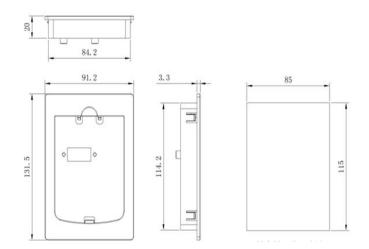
Appearance and installation dimension of external keypad [old product ] (keypad tray)
